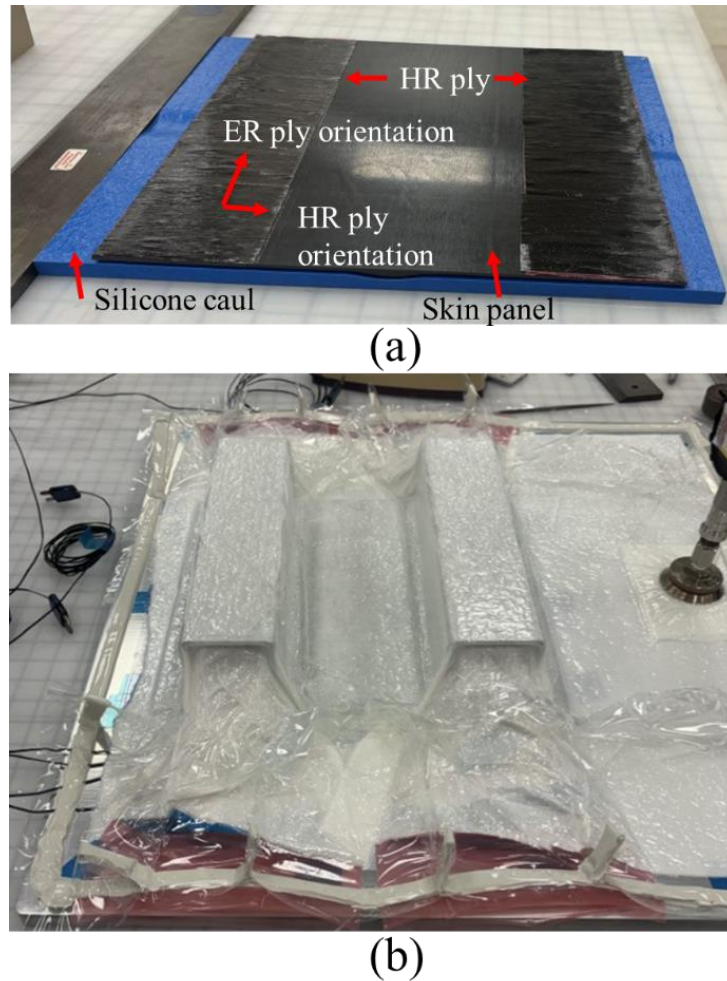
(a) HR plies on MDU 2 skin panel, (b) bagged MDU 2 assembly.
